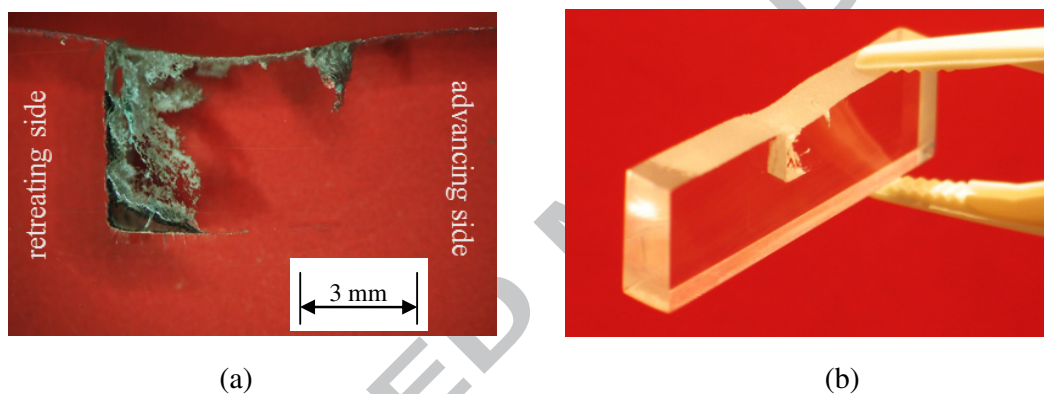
Two (a) and three (b) dimensional images of tool 2 weld
